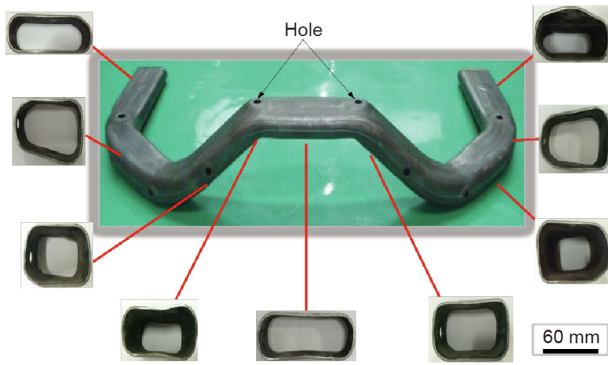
Hydroformed chassis engine cradle of a passenger car from First Automotive Works, China.
